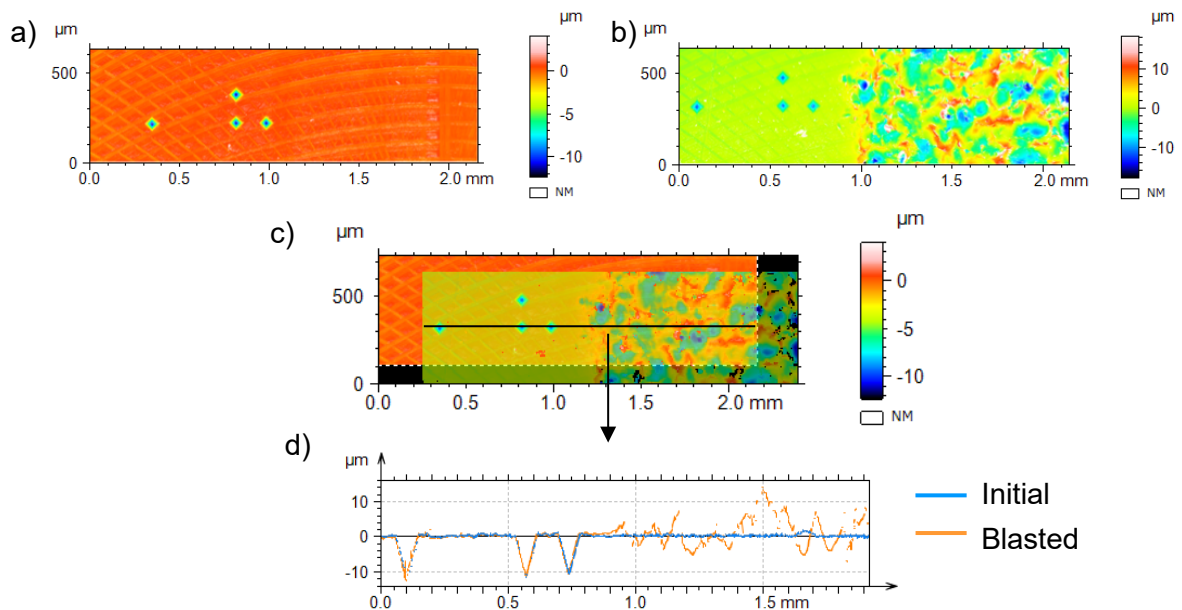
Milled Specimen a) Pre-measurement of initial surface (A) b) Post-measurement after blasting (B) c) superimposition of surfaces A and B d) extracted profile
